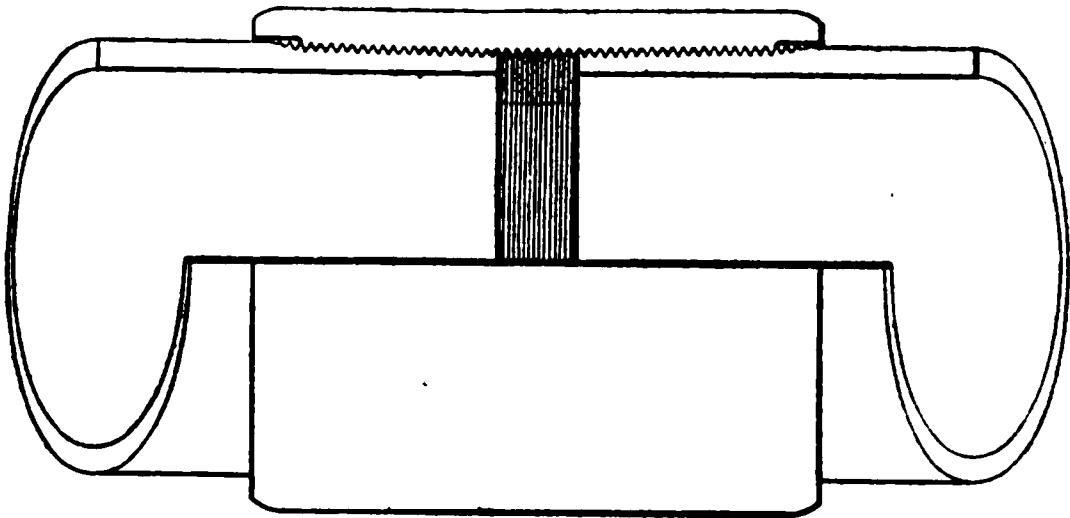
Typical Section of South Penn Casing Coupling and Joint
